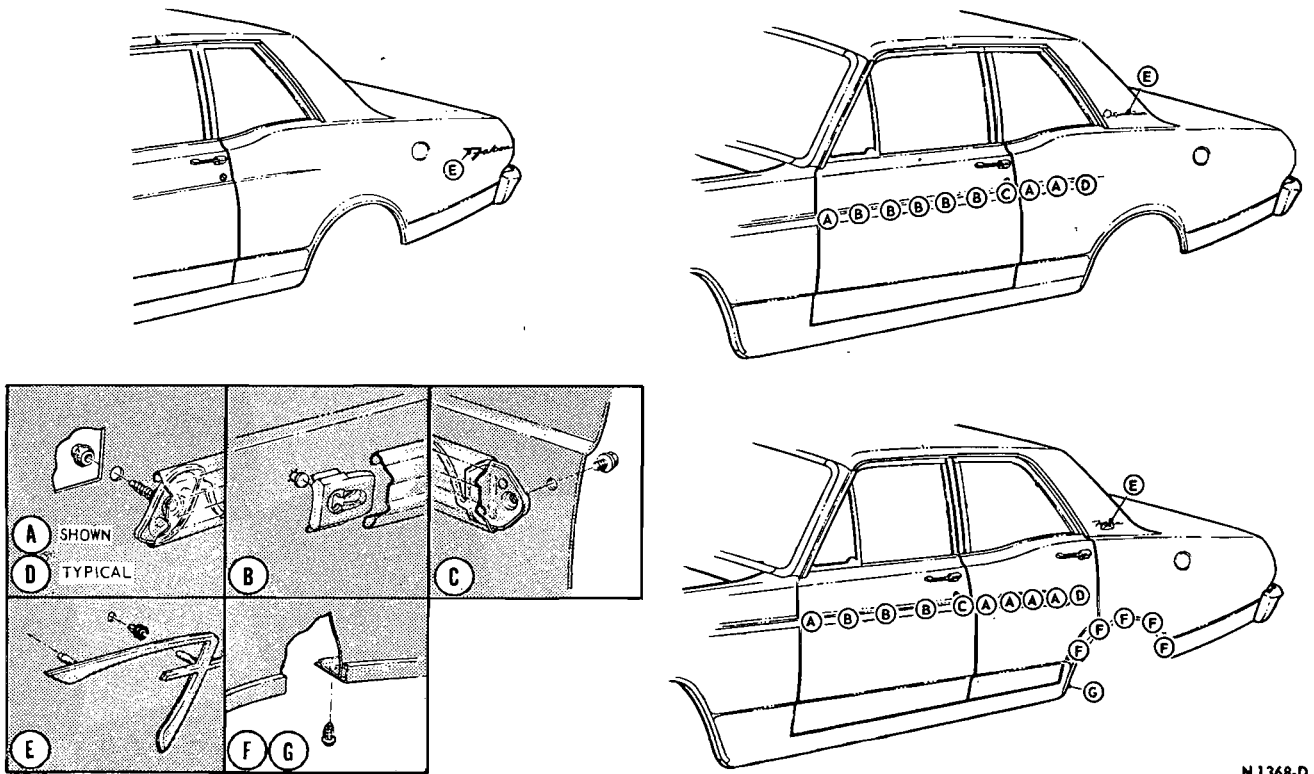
Falcon Exterior Side Mouldings—Models 54 & 62
